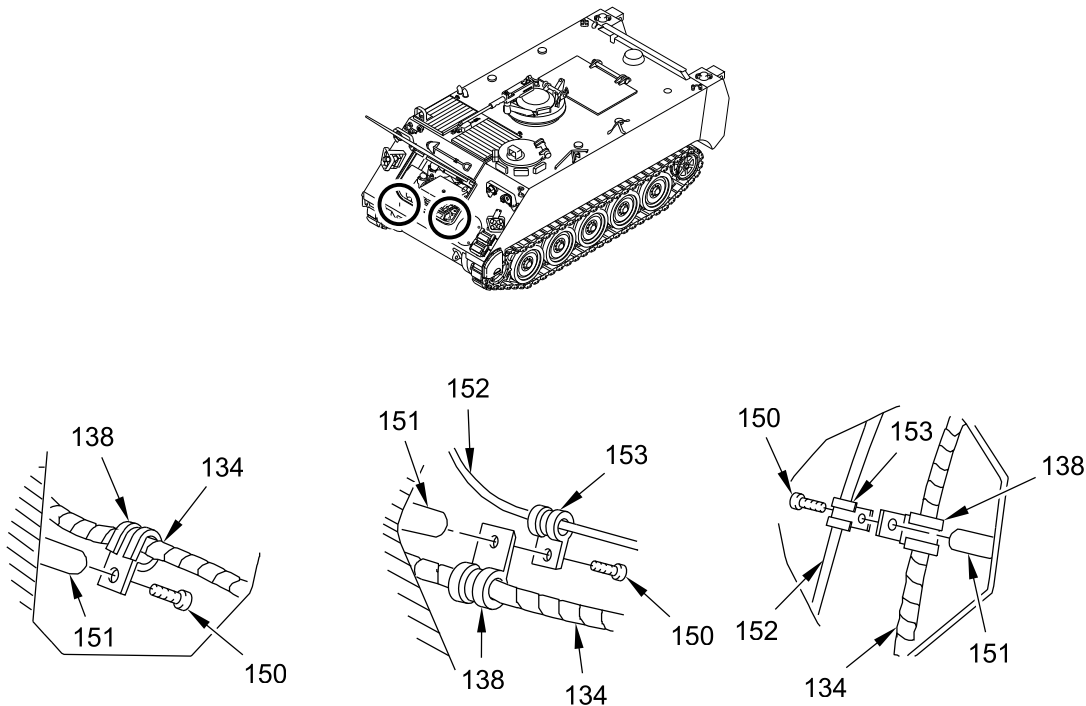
Smoke Grenade Wiring Harness – Clamping.
